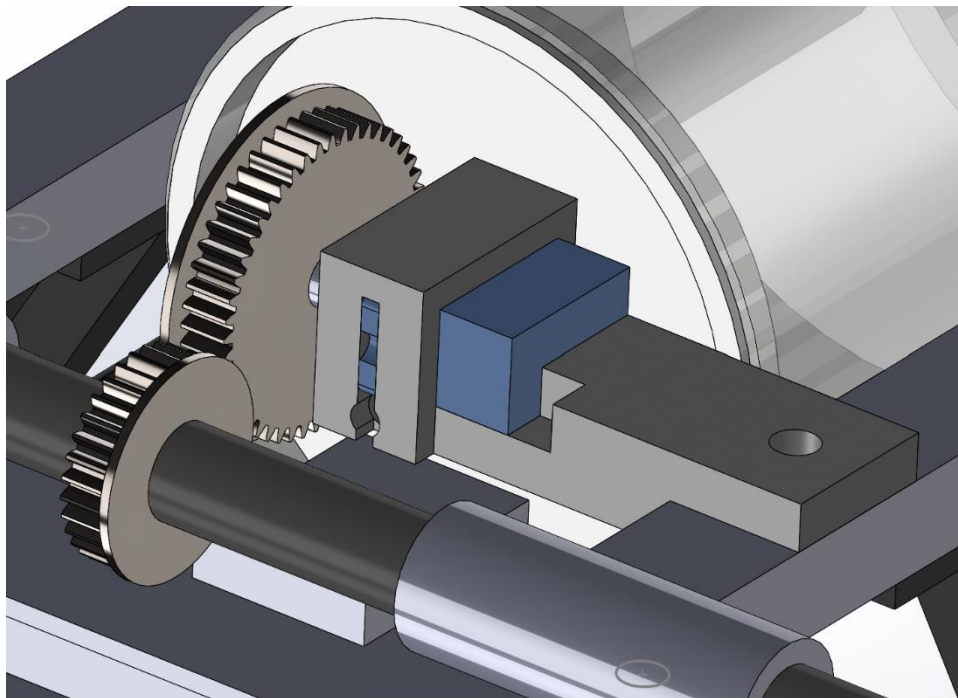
Gear Mechanism Controlling Gimbaling Axis.
